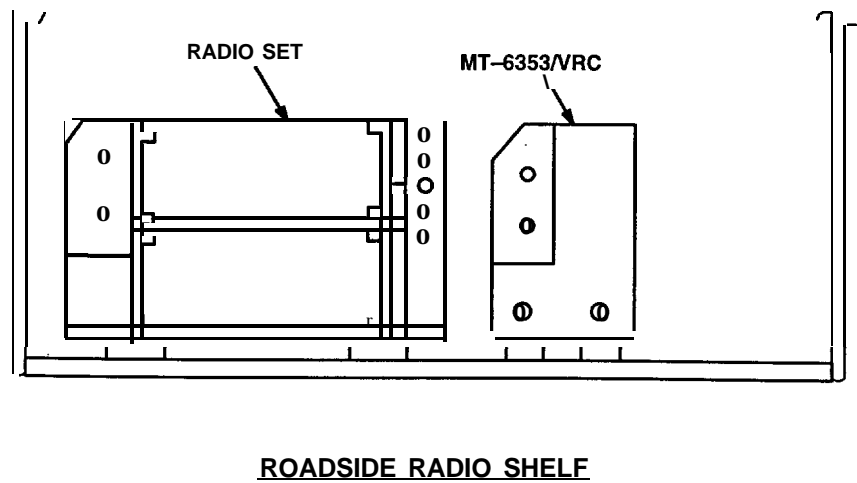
(2). MK and Radio Installation: Radio Equipment Locations
